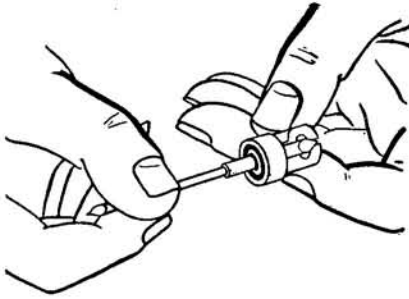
Clean the pressure chamber of the nozzle with special tool as shown.
